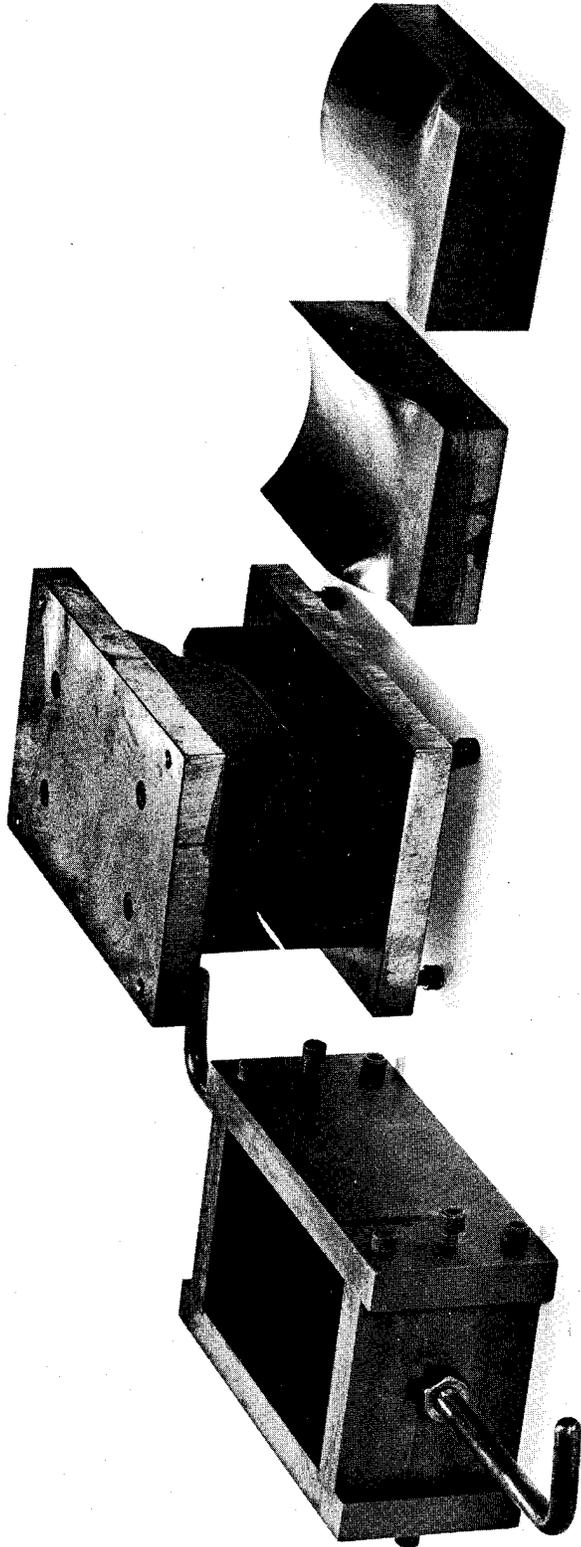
COMPOSITE BLADE SPECIMEN PREFORM AND MOLD TOOLING.
